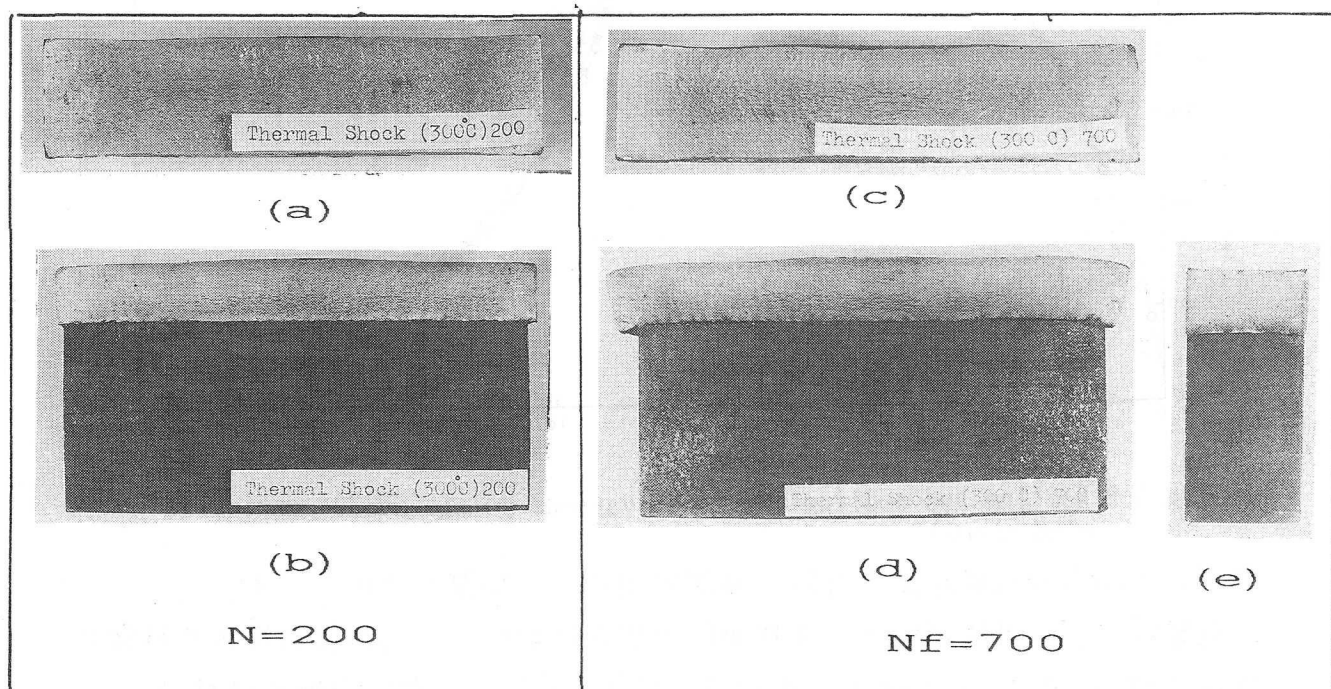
Deformation of aluminium explosive clad steel after thermal cycling (300°C) [(a), (c) aluminium surface; (b), (d) longitudinal side; (e) transverse side]
